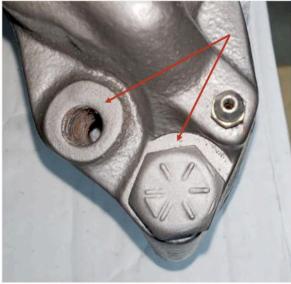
RF Caliper top view. Red circles show machined areas adjacent of the disc brake pads retaining pin.
